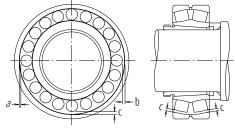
Measuring Clearance in Large Spherical Roller Bearing
